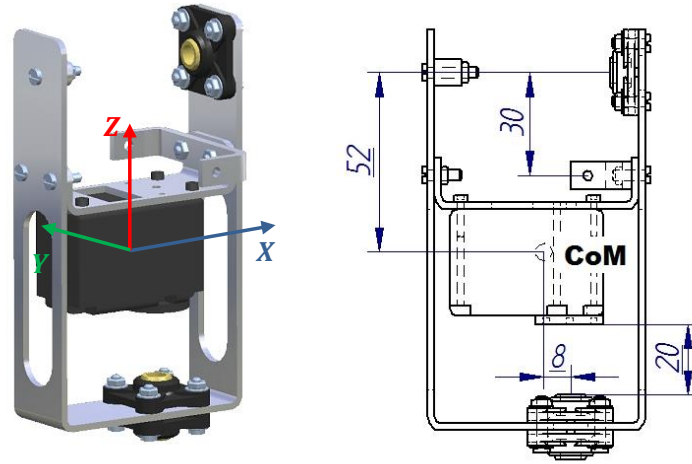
CoM and dimensions (in mm) of the shoulder yaw structure.
